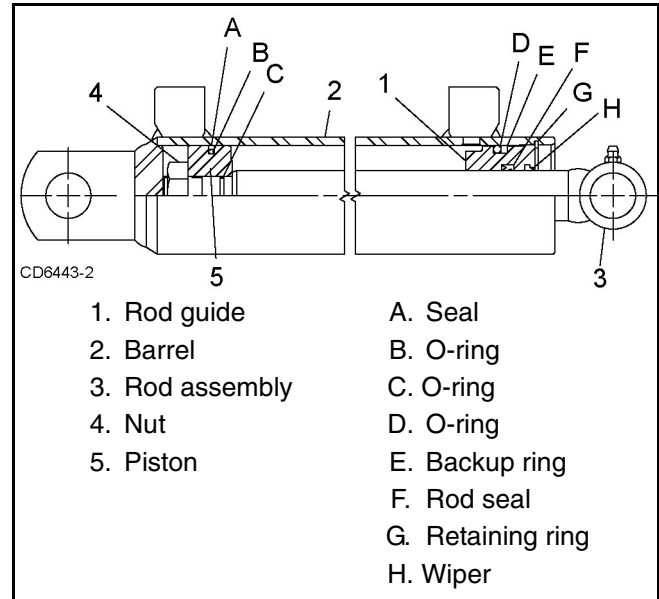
Boom, Dipper, Bucket, Stabilizer Cylinder
